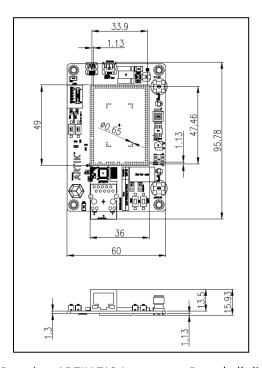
Mechanical Drawing ARTIK 710 Interposer Board all dimensions are in [mm]
